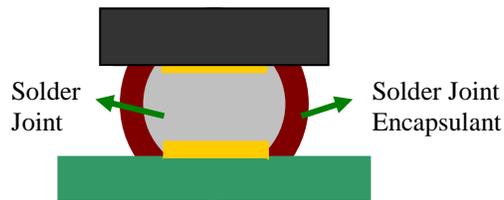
Schematic of Cured SJEA Encapsulated Solder Joint
